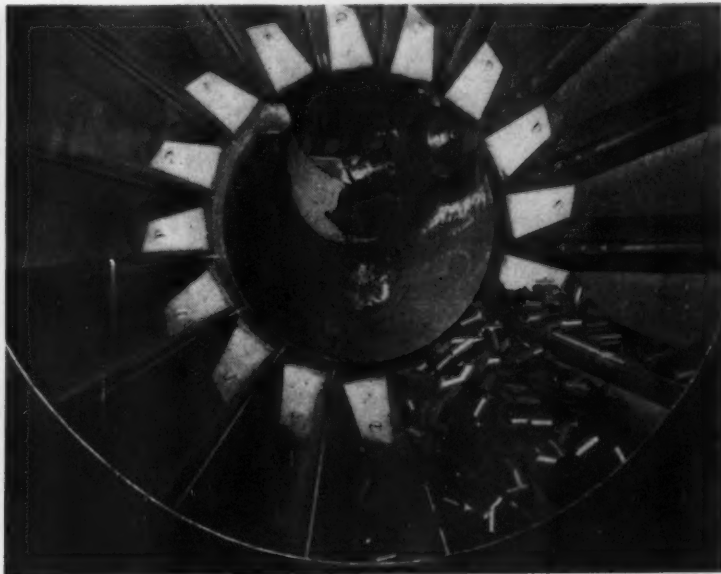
This hopper feed picks up vanes on steel rods and carries them to the wire brush that peels them off into a delivery tube for assembly of the overrun coupling.
